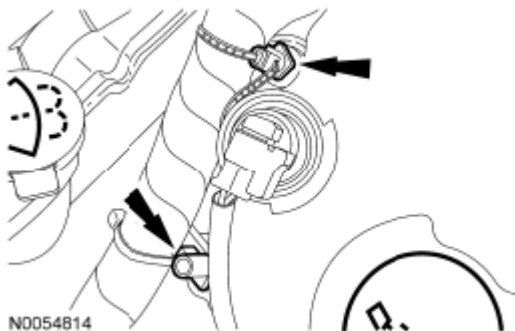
Locating LH Valve Cover Stud Bolts & Wiring Harness
